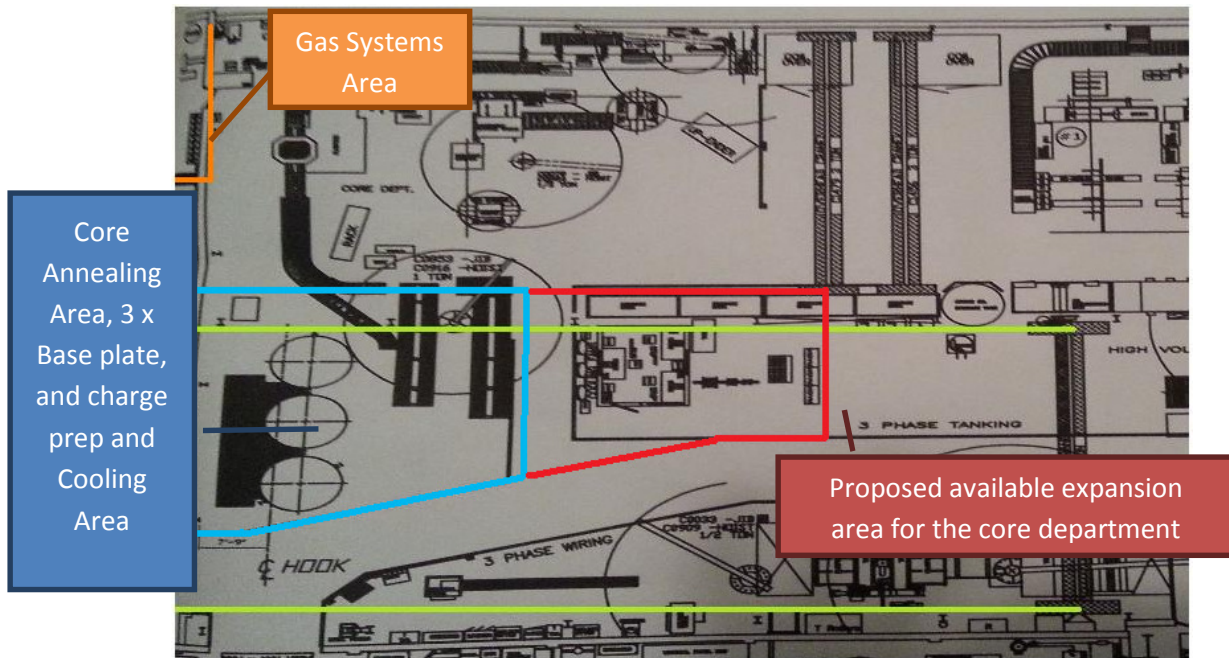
Annealing department floor plan [10]. Courtesy of Carte International Inc.
